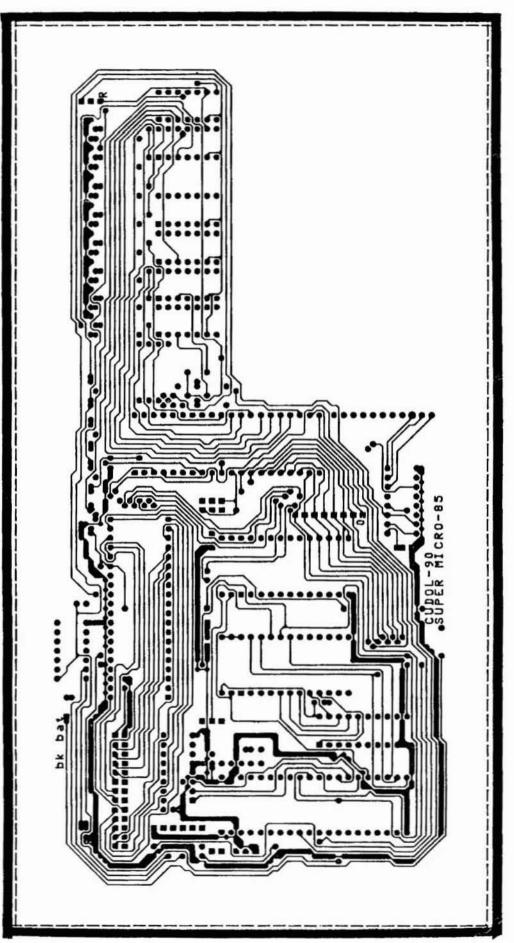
(b) Layout of PCB for Field data analyser (Component side)
